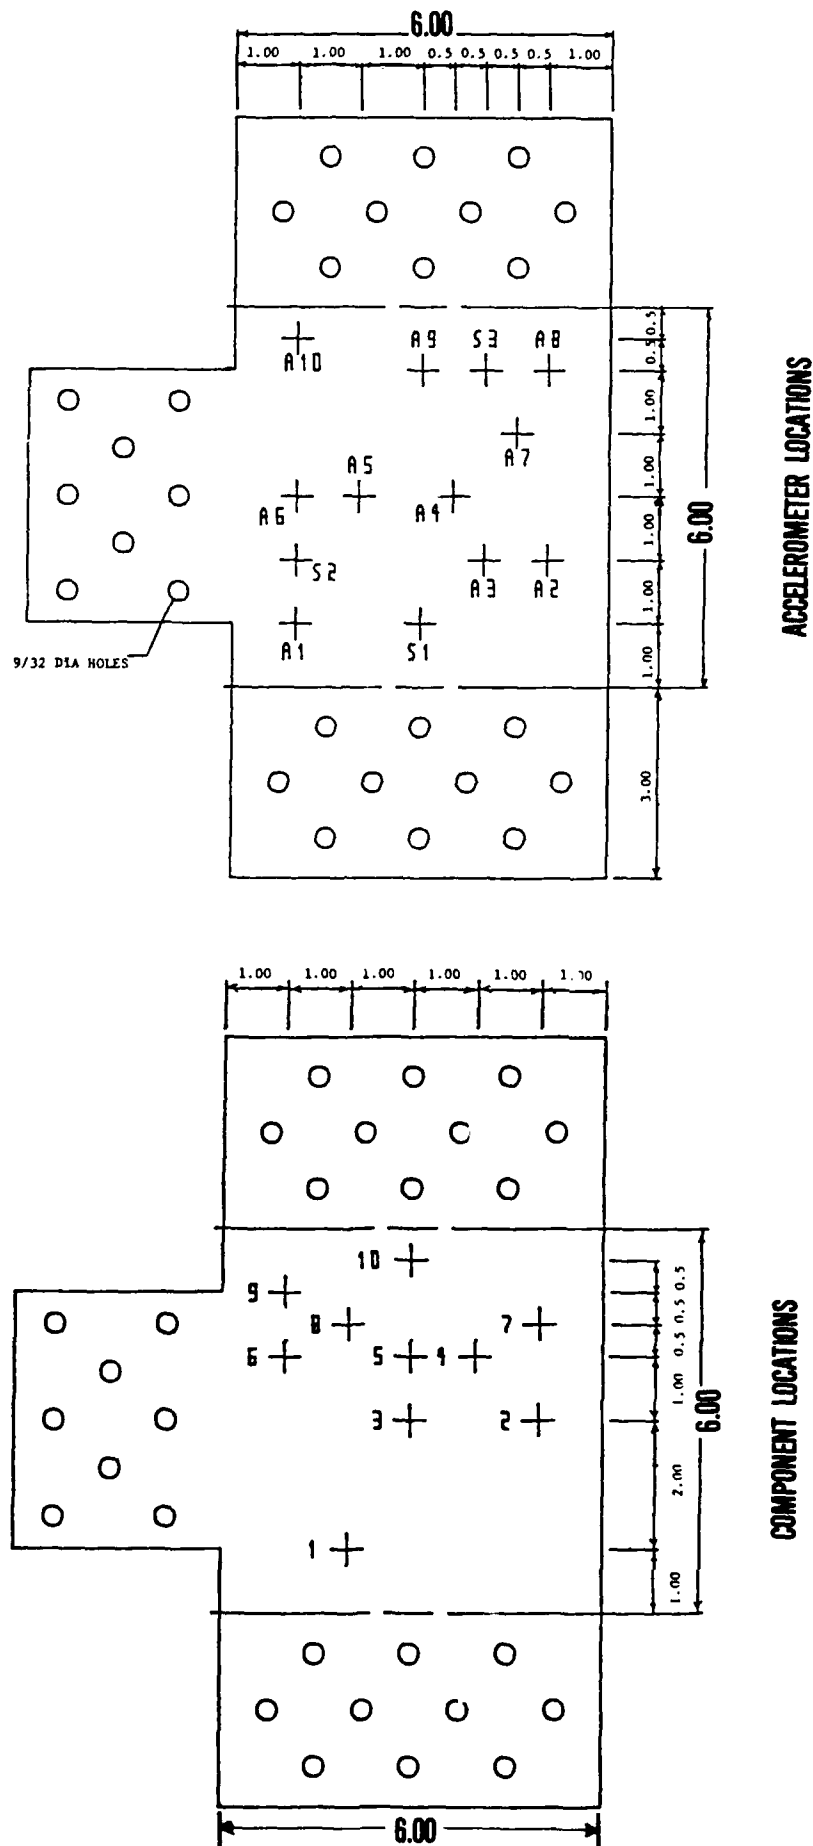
COPPERCLAD & STEEL PLATE (THREE EDGES FIXED) COMPONENT & ACCELEROMETER LOCATIONS
